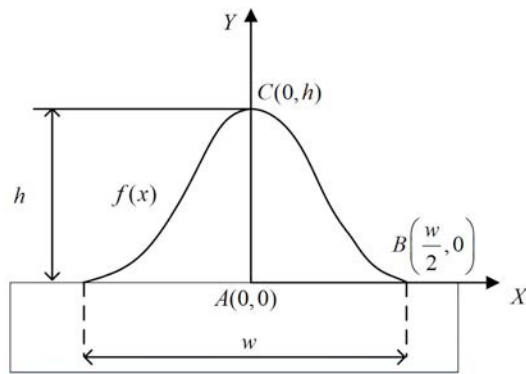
Parabola profile shape weld seam representation. w is representing the width, h is representing the height
